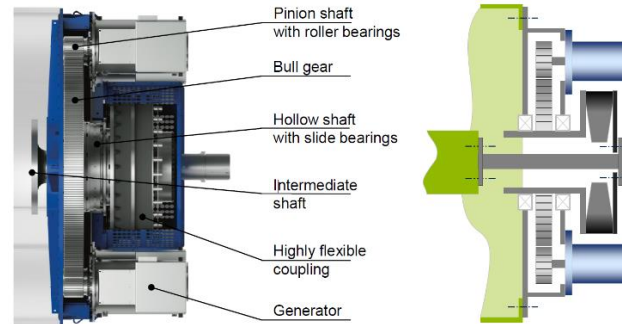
IFPS® with two generators mounted on a two stroke diesel engine
